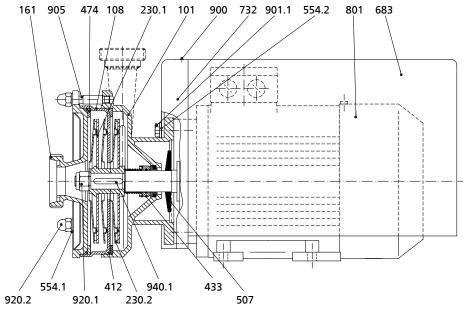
General assembly drawing, Vitastage 05/1 - 05/8
